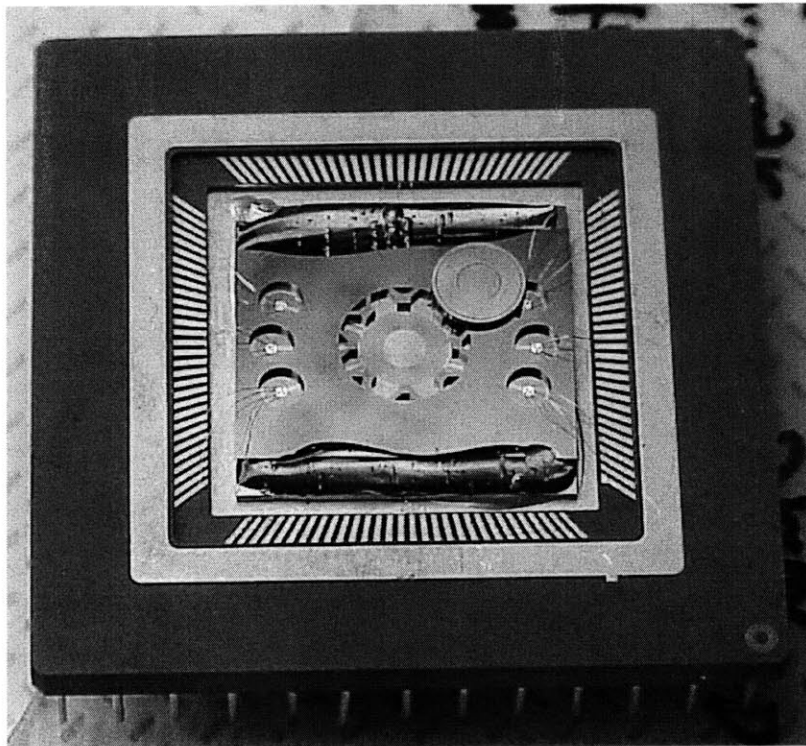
Assembled and packaged tethered motor TMB. Scale is in inches. This figure shows the method of die-level assembly using non-metallic epoxy and precise alignment. The rotor of this motor became dislodged and is shown overturned at the upper right of the chip.
